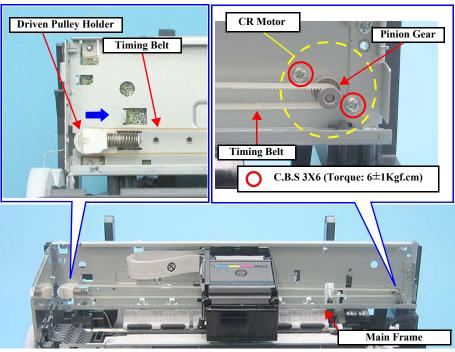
Releasing Timing Belt and Removing CR Motor
